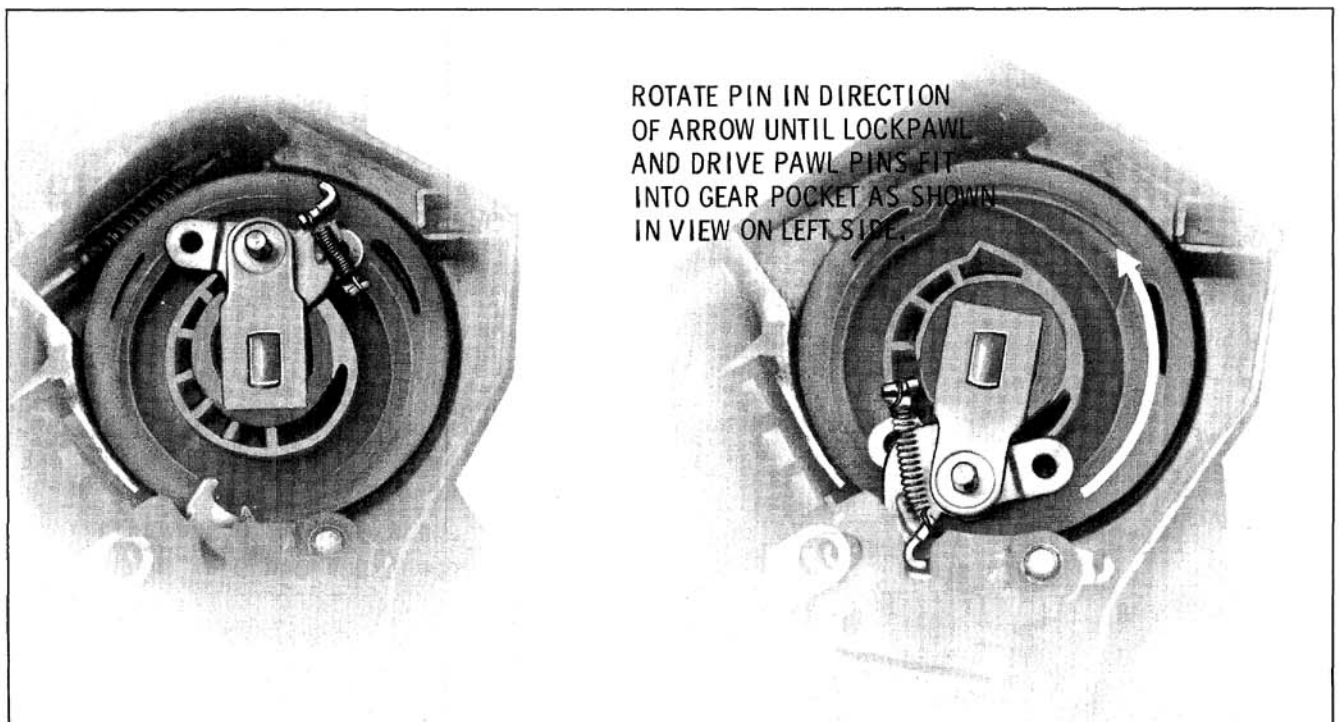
Lock Pawl and Drive Pin Positioning
